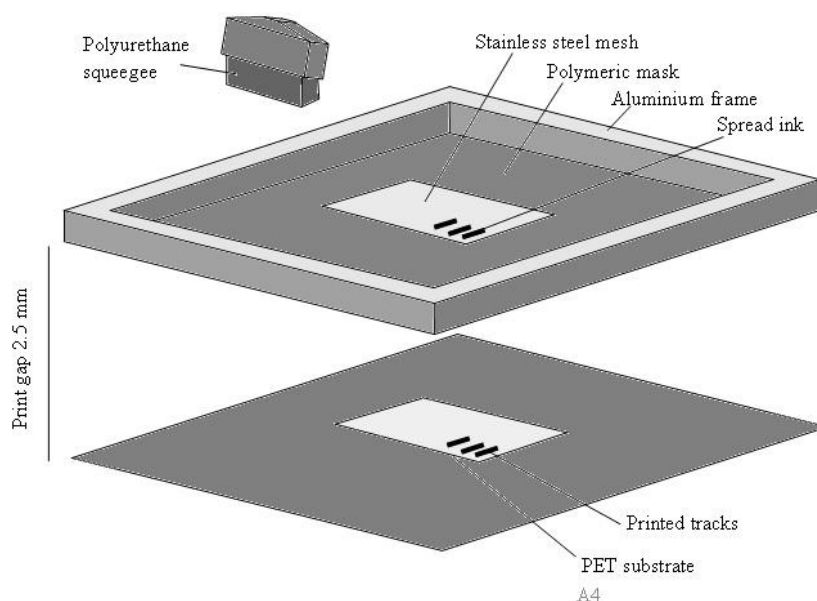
Hand printing apparatus using squeegee, stainless steel mesh at high tension in aluminium frame with (purple) photo cured polymeric mask printing onto PET sheet (drawing not to scale)
